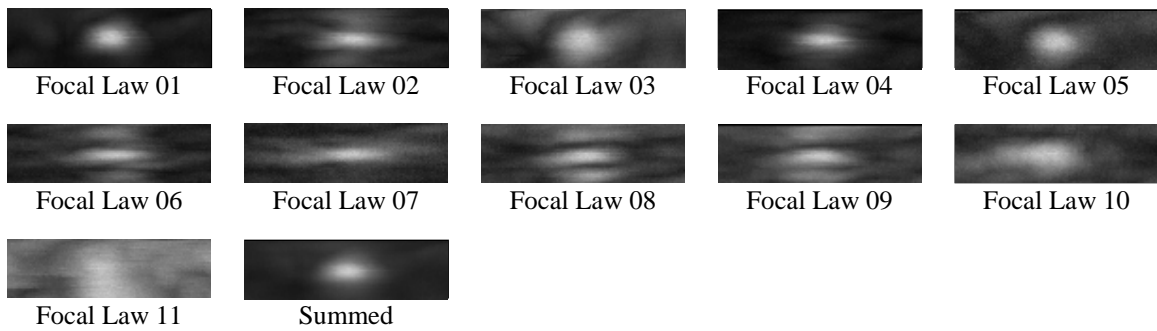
3D method inspection C-scans of curved interface forging coupon #9.
